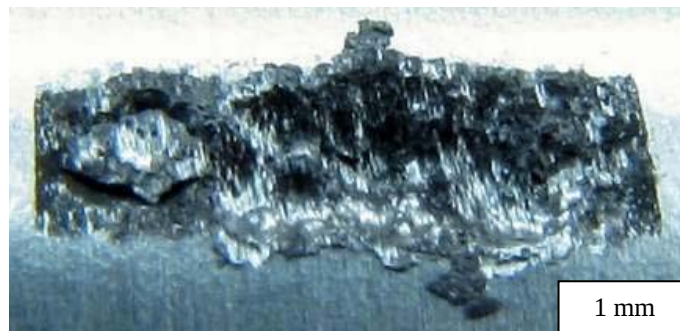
Pitting of the hardware surface due to high friction with the gasket resulting in fretting.
